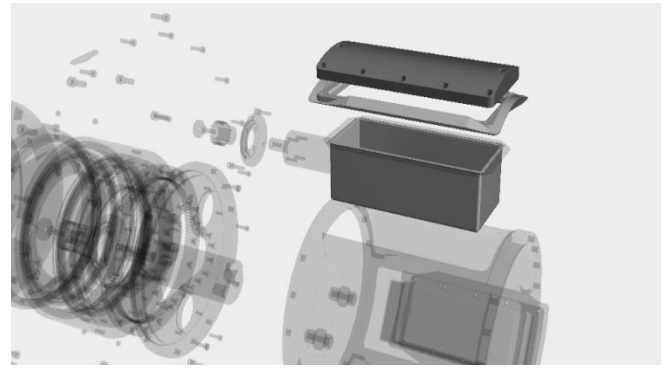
exploded 3D drawing of the drilling head, focus on GPR antenna mechanical slot
